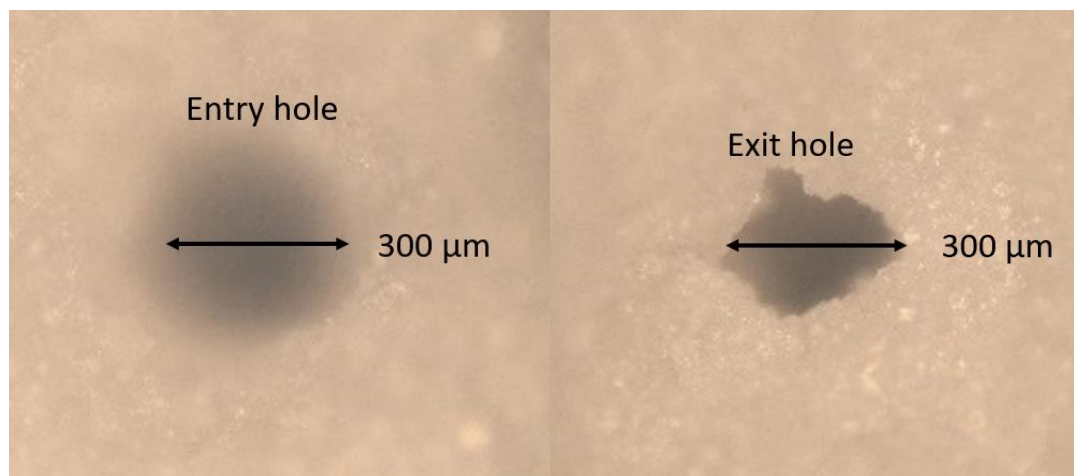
Holes by laser drilling in an alumina cylinder of 2.5 mm depth, left picture showing the entry, right picture the exit hole.
